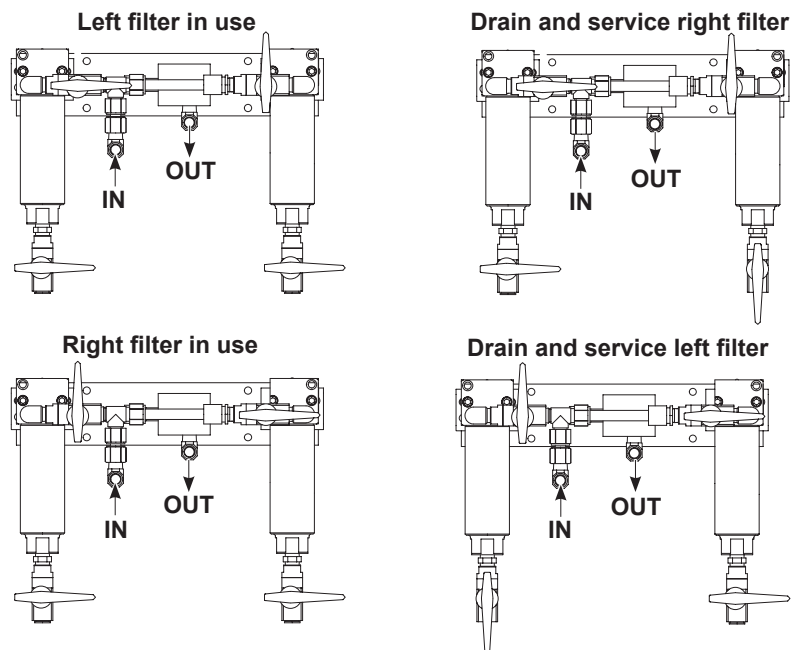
Handle Positions -Inverted Dual Filter Assembly with Check Valves
